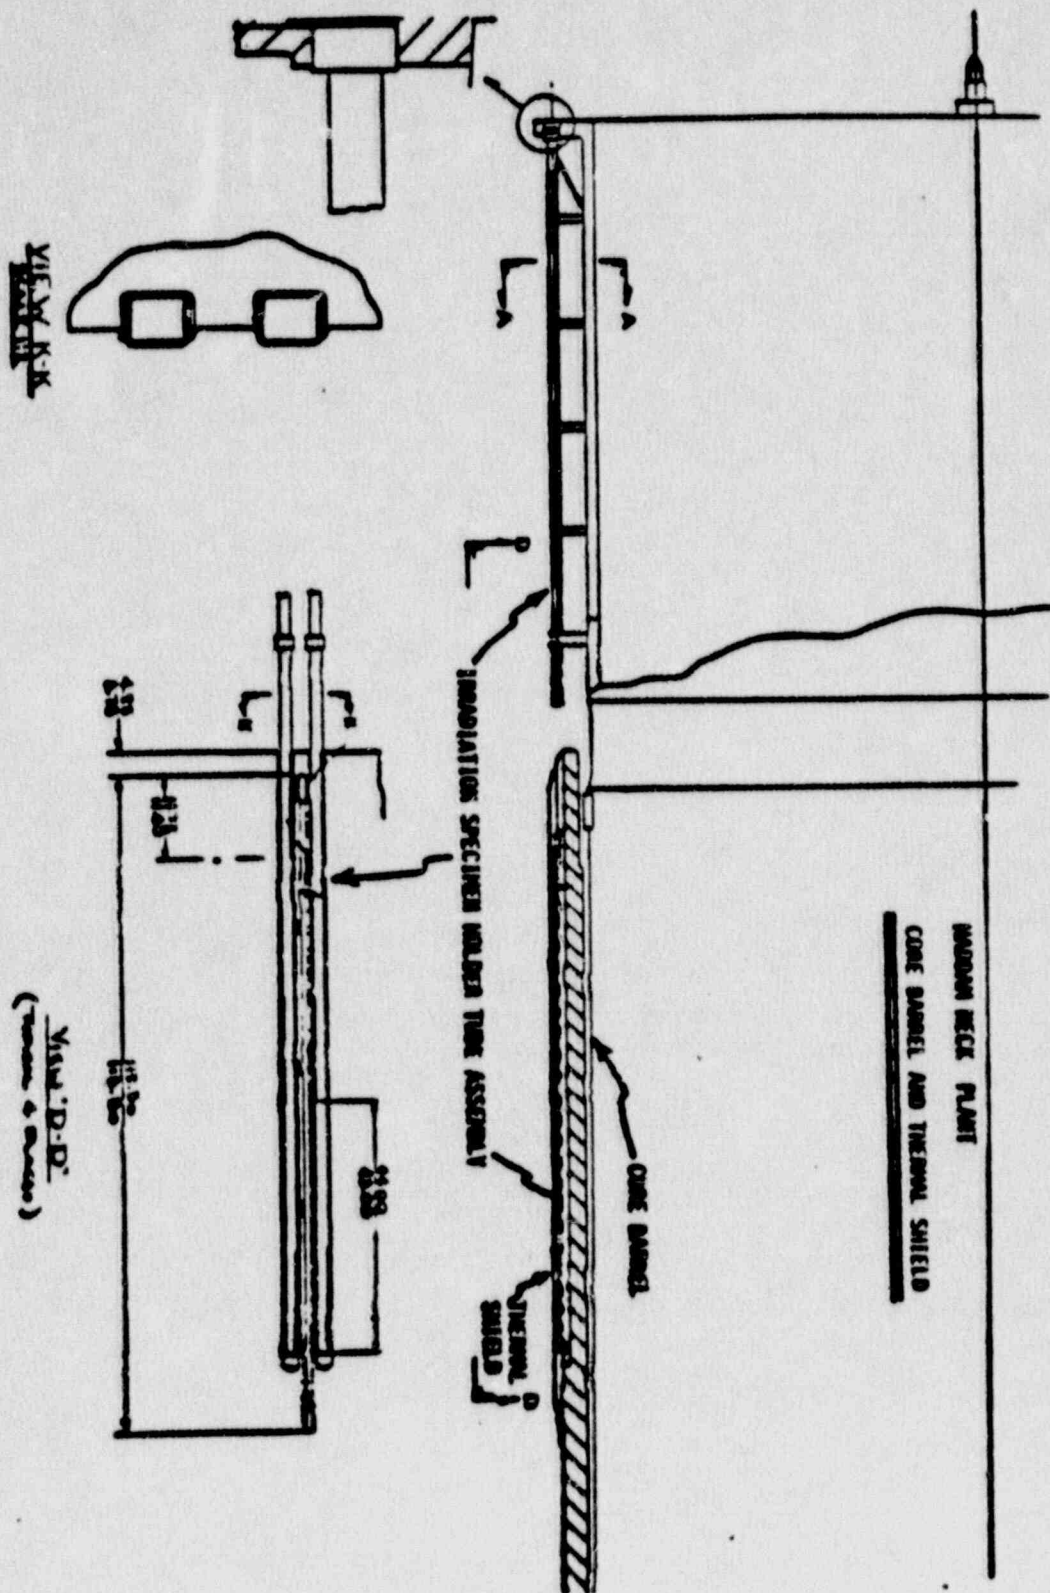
Irradiation Specimen Holder Tube Assembly
